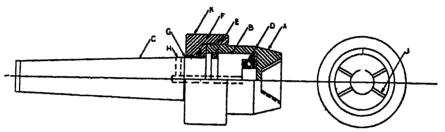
SPECIAL FIXTURE FOR DRIVING WORK
